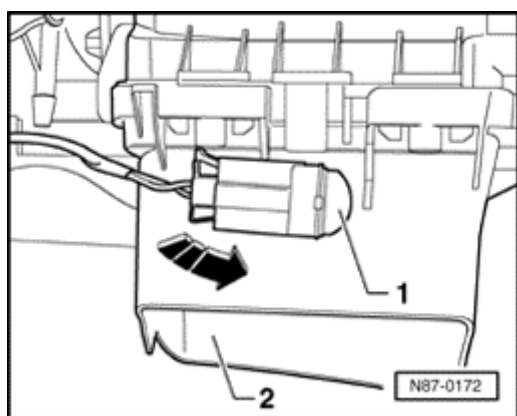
Sender for outlet temperature, floor outlet -G192-, removing and installing
